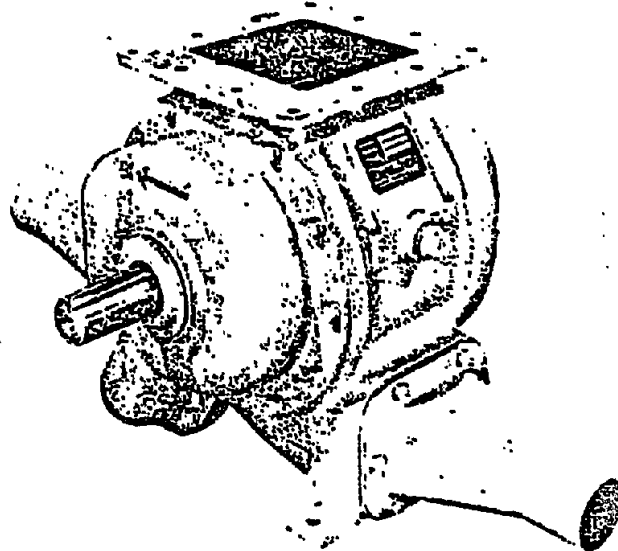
EXTERNAL VIEW OF AIR-SWEPT DOUBLE ENTRY FEEDER VALVE (CEA-CARTER-DAY COMPANY)
